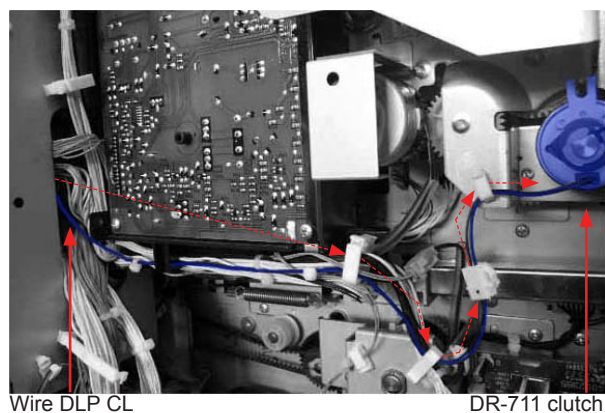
Electrical components 2; To control the clutch, a connector has been added to the engine PCB (Parts,PWB engine ass'y,SP).
